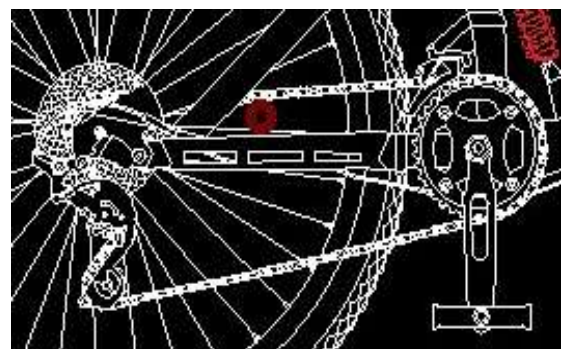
Sprocket with shimano 7 gear drive mechanism
